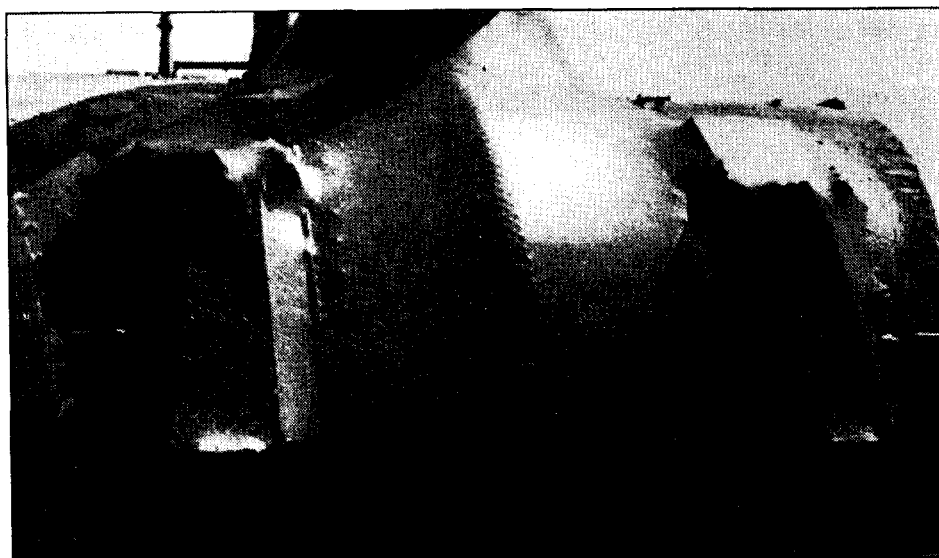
4 IN. TWIN MOUNTING. FRONT PART OF MOUNTING SPRAYED WITH LATEX
